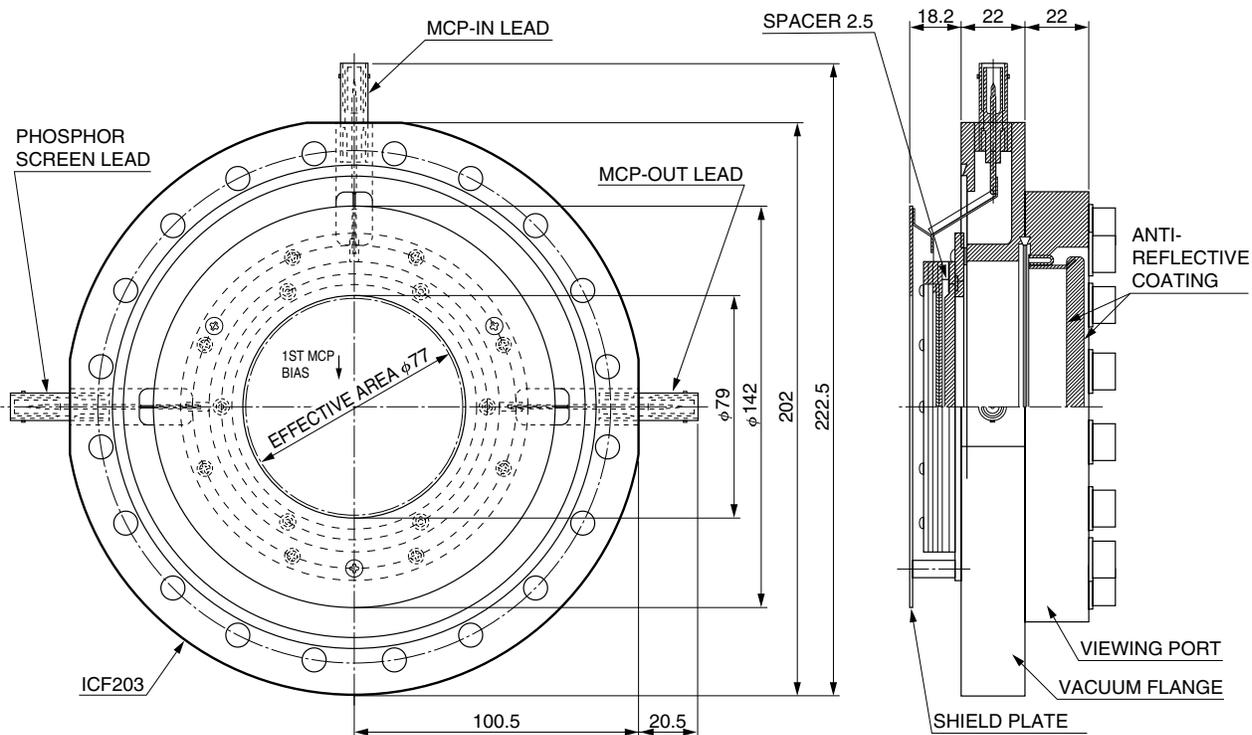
Large Area MCP/Phosphor Screen/Vacuum Flange Assembly
